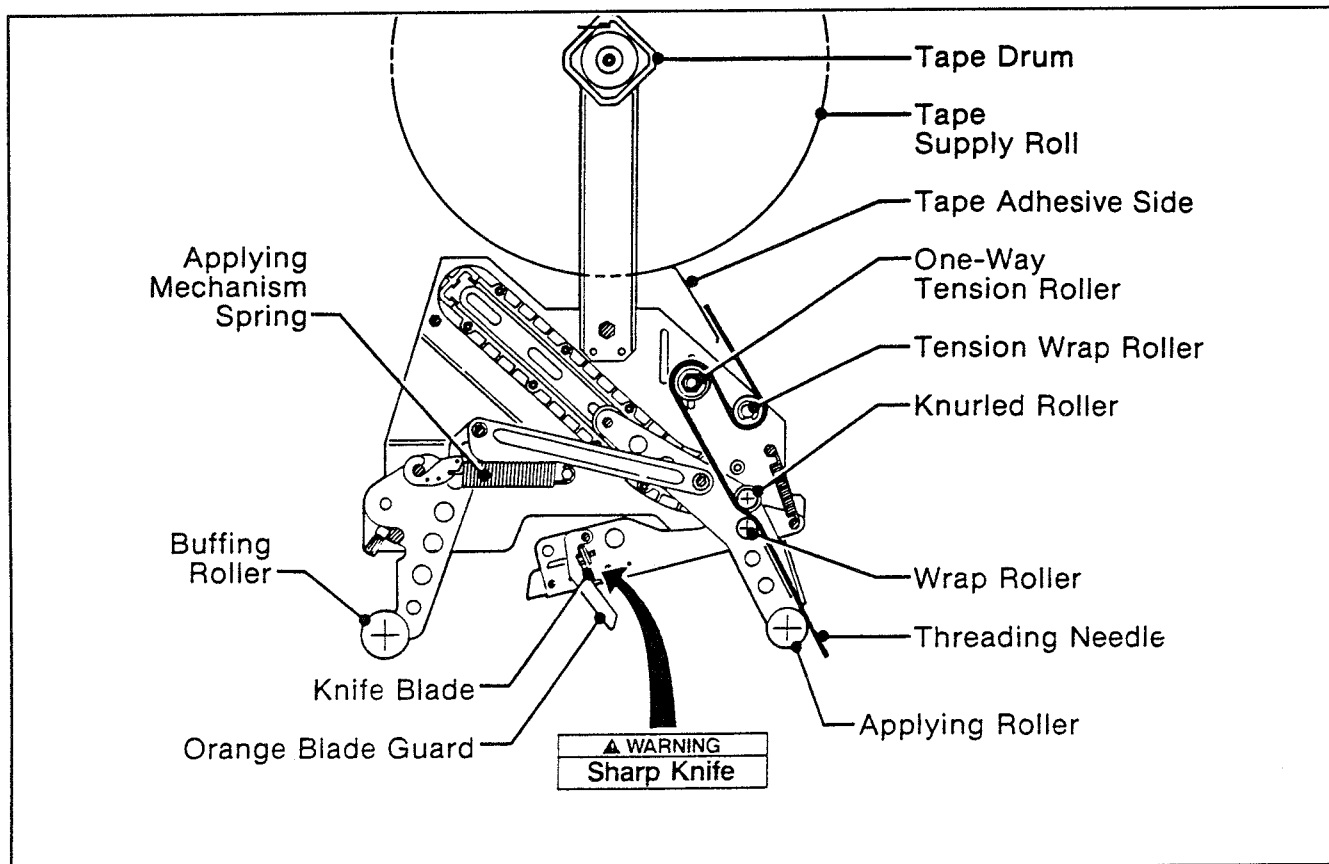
Tape Threading Diagram - Top Taping Head - Left Side View
